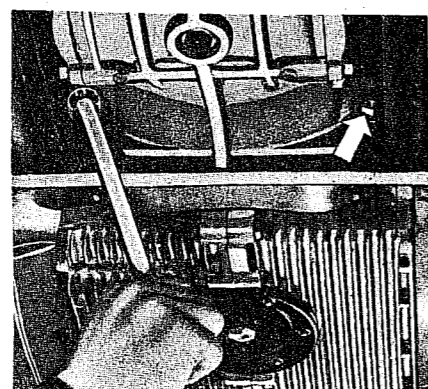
Removing the engine lower mounting nuts - 17mm.
